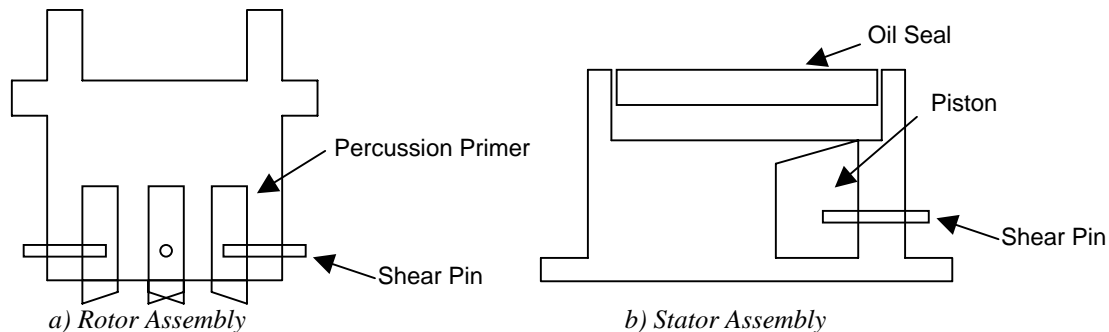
Rotor in Cross Section Illustrating Shear Pin.
